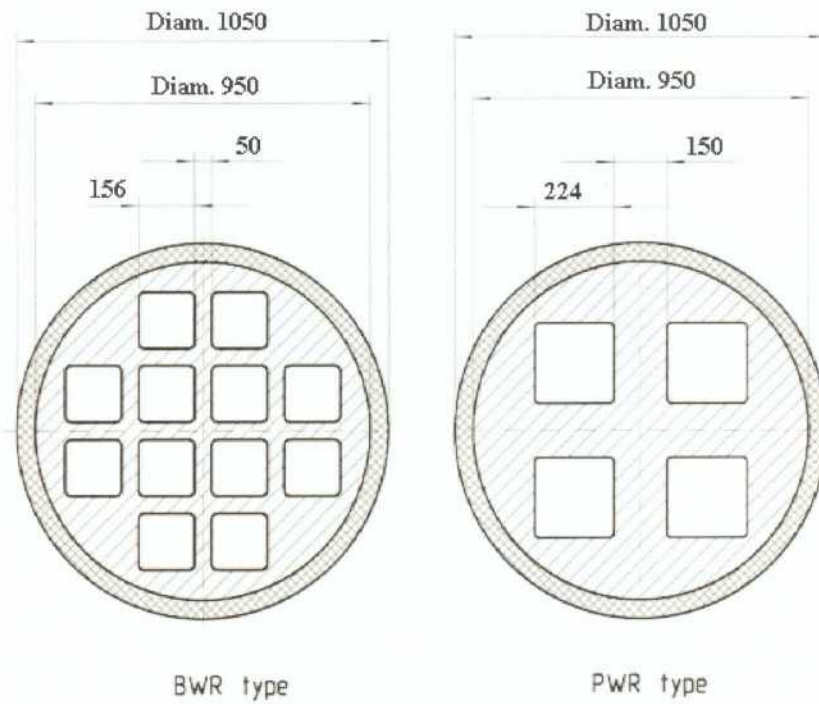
Cross section of canisters in which 12 BWR fuel assemblies and 4 PWR fuel assemblies respectively, can be placed.
